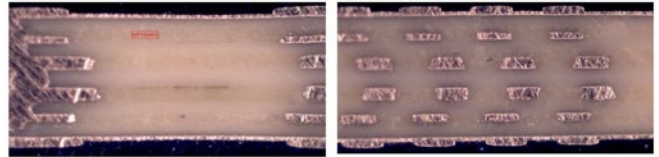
Cross-sectional image showing the flatness of a printed wiring board manufactured using only a non-reinforced bonding material.
